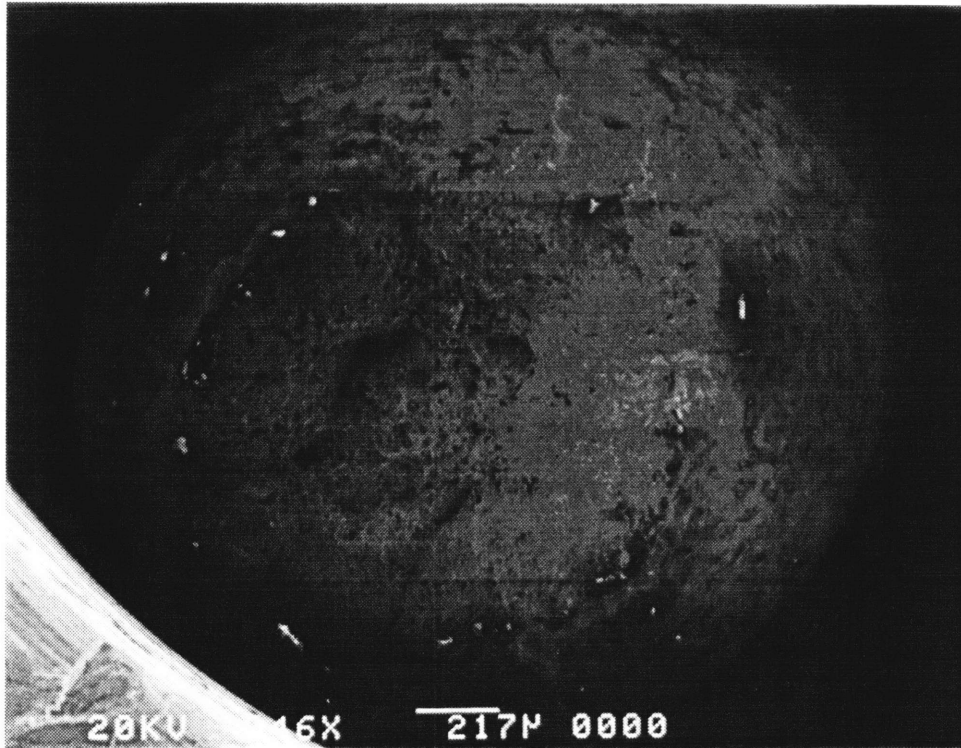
Fracture surface of specimen 98 (CP 304,AJ9139,0 n/m²).
